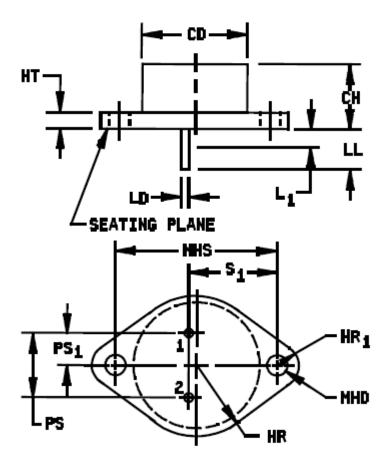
Physical dimensions (similar to TO-204AA formally TO-3).
